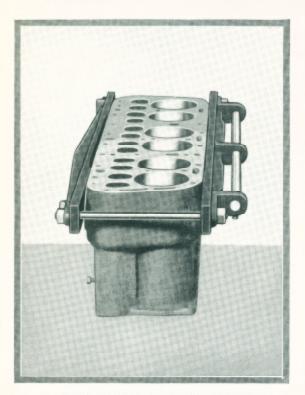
C — Cradle Clamps Bolted to Cylinder Block.
